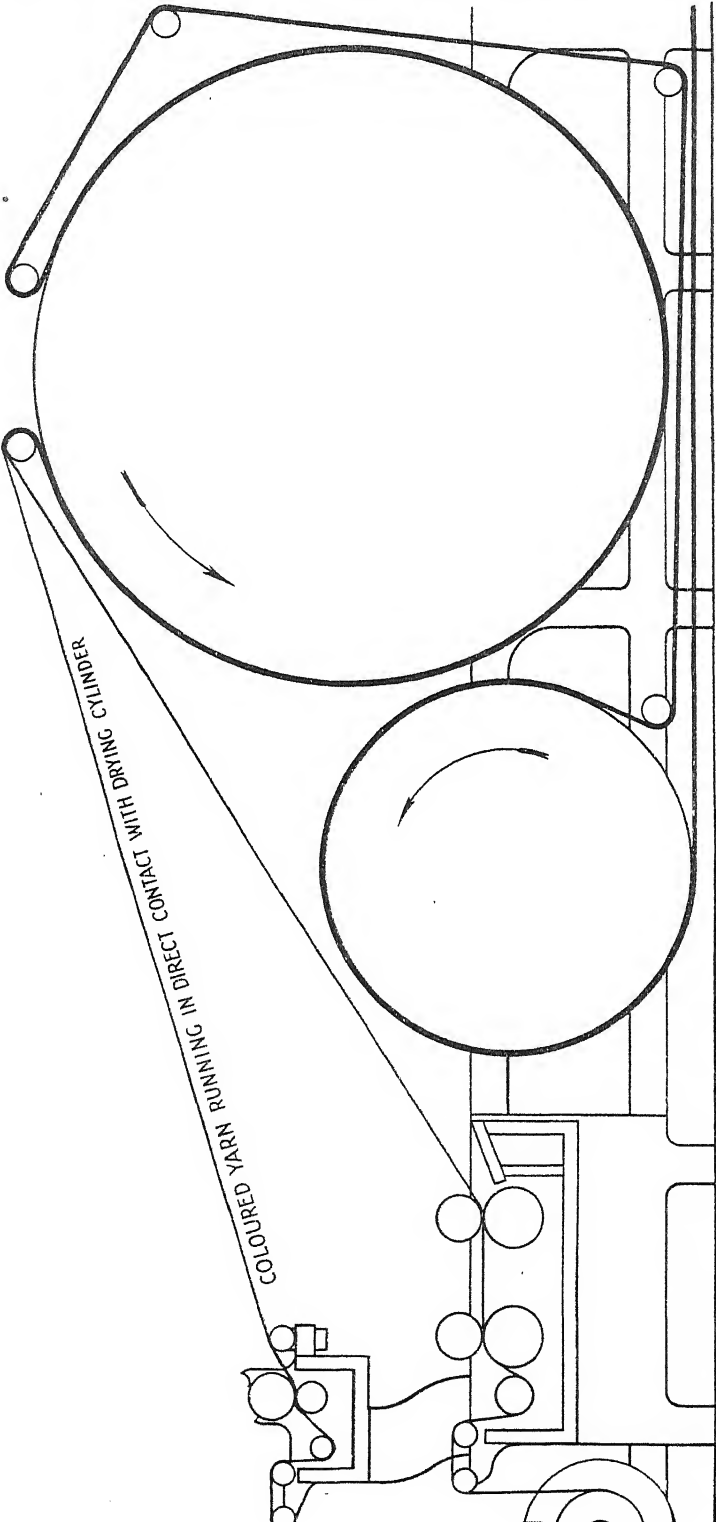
Tape Sizing Machine showing coloured yarn running in contact with the drying cylinder
